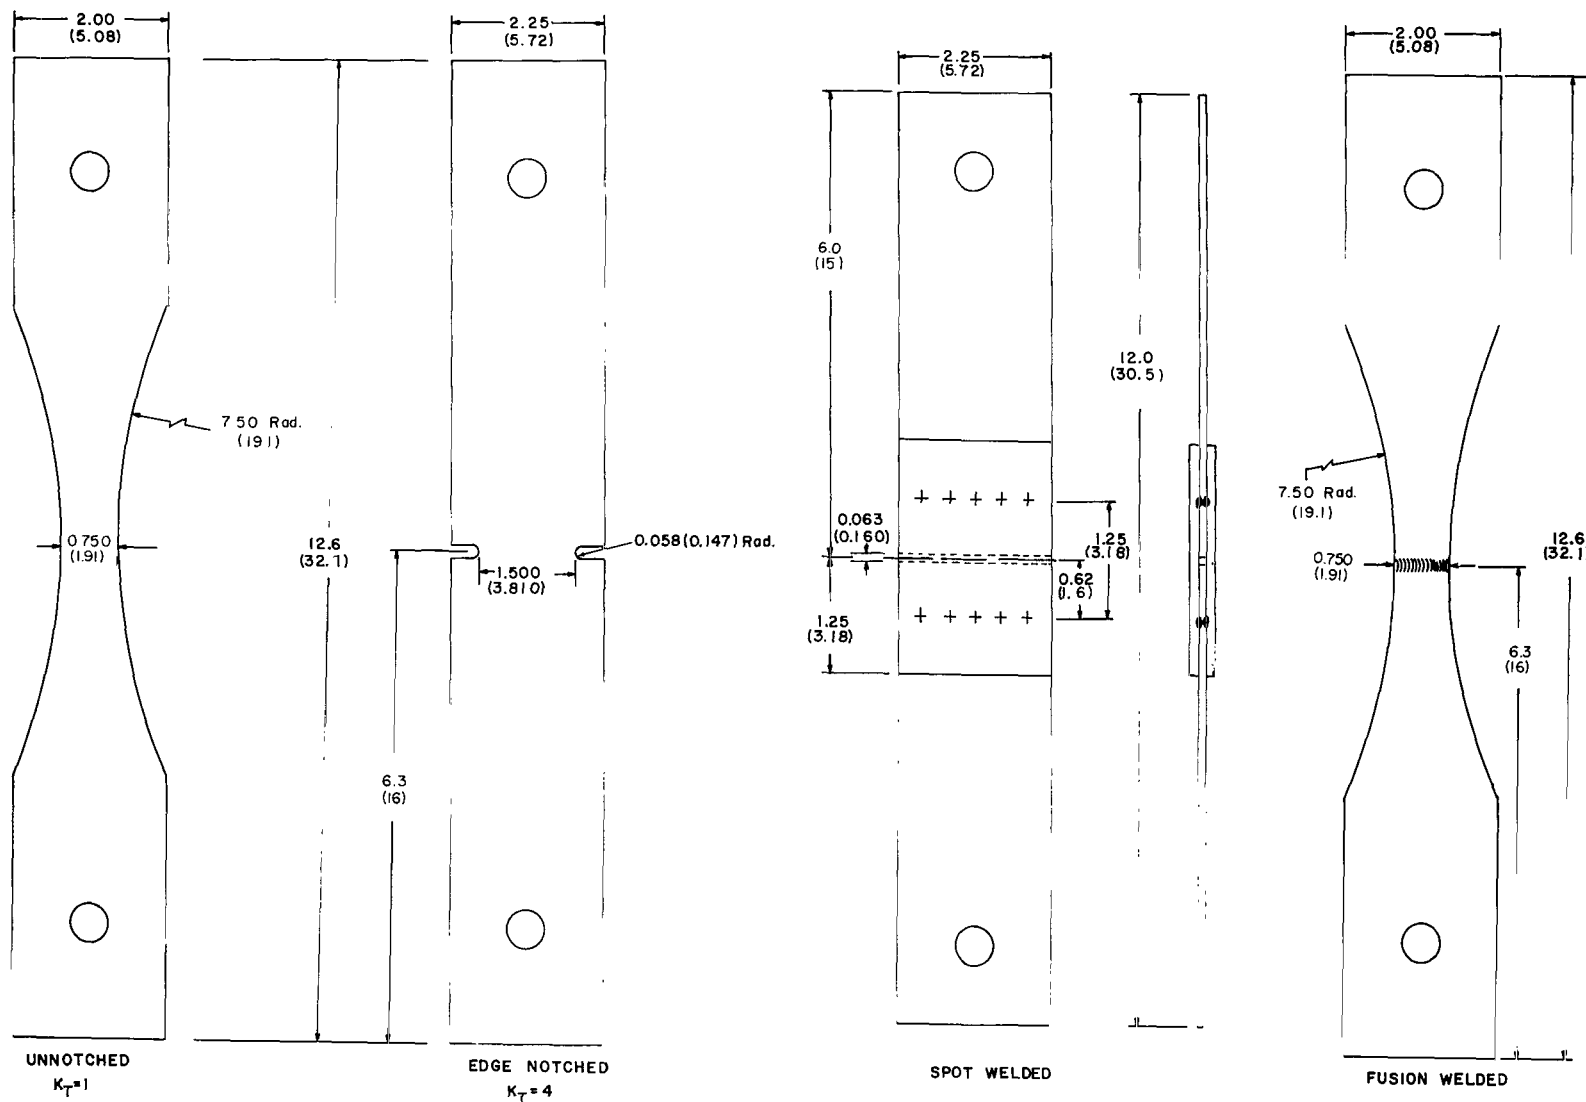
Fatigue specimens. All dimensions are in inches (centimeters).
